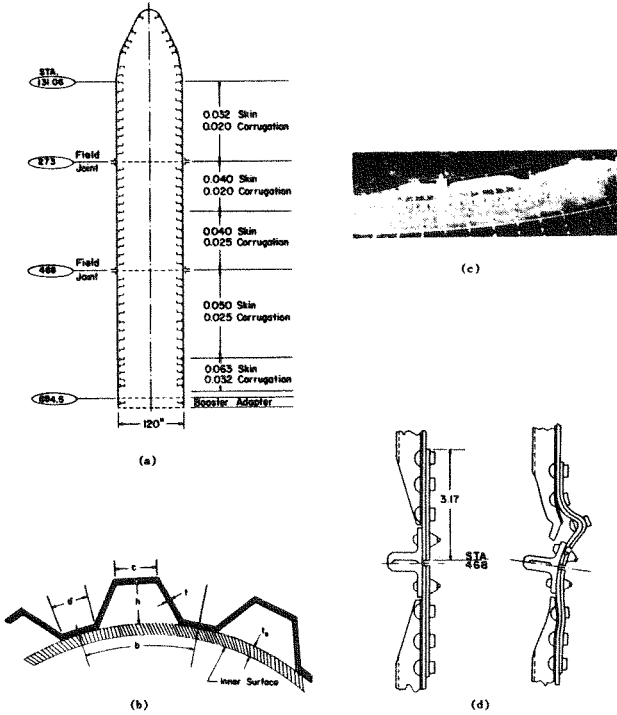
Local failure of a large payload shroud under axial compression and bending: (a) Typical ring-stiffened rocket payload shroud configuration; (b) Corrugated, semi-sandwich wall; (c) Interior view of portion of complete shroud buckled locally next to field joint at Station 468; (Three waves are visible.) (d) Field joint geometry and buckle configuration. Buckling is caused by the narrow band of circumferential compression arising from the inward excursion of the axial load path near the field joint.
